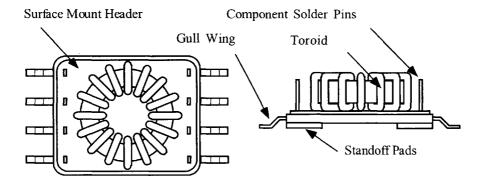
Gull Wing Surface Mount Carrier (SMC).
